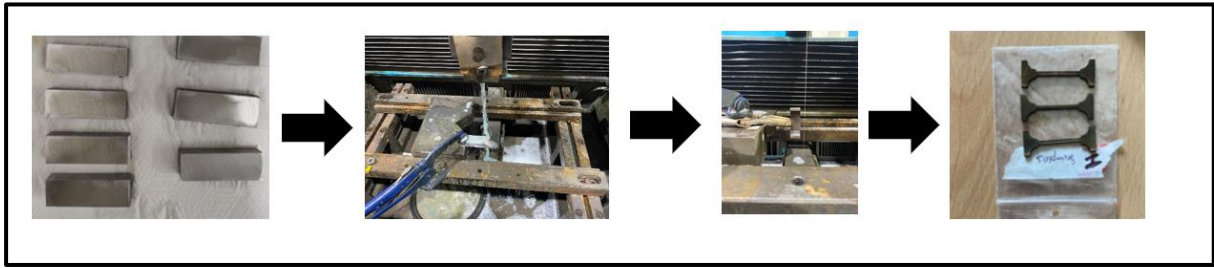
Illustration of steps involved for preparation of tensile testing specimen
